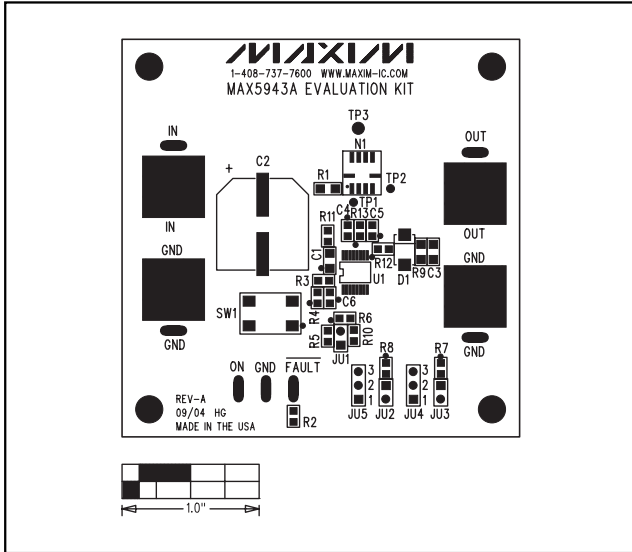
MAX5943A EV Kit Component Placement Guide—Component Side
